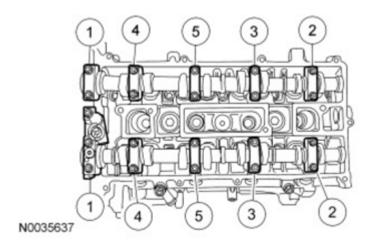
Identifying Camshaft Bearing Cap Bolts Loosening Sequence
